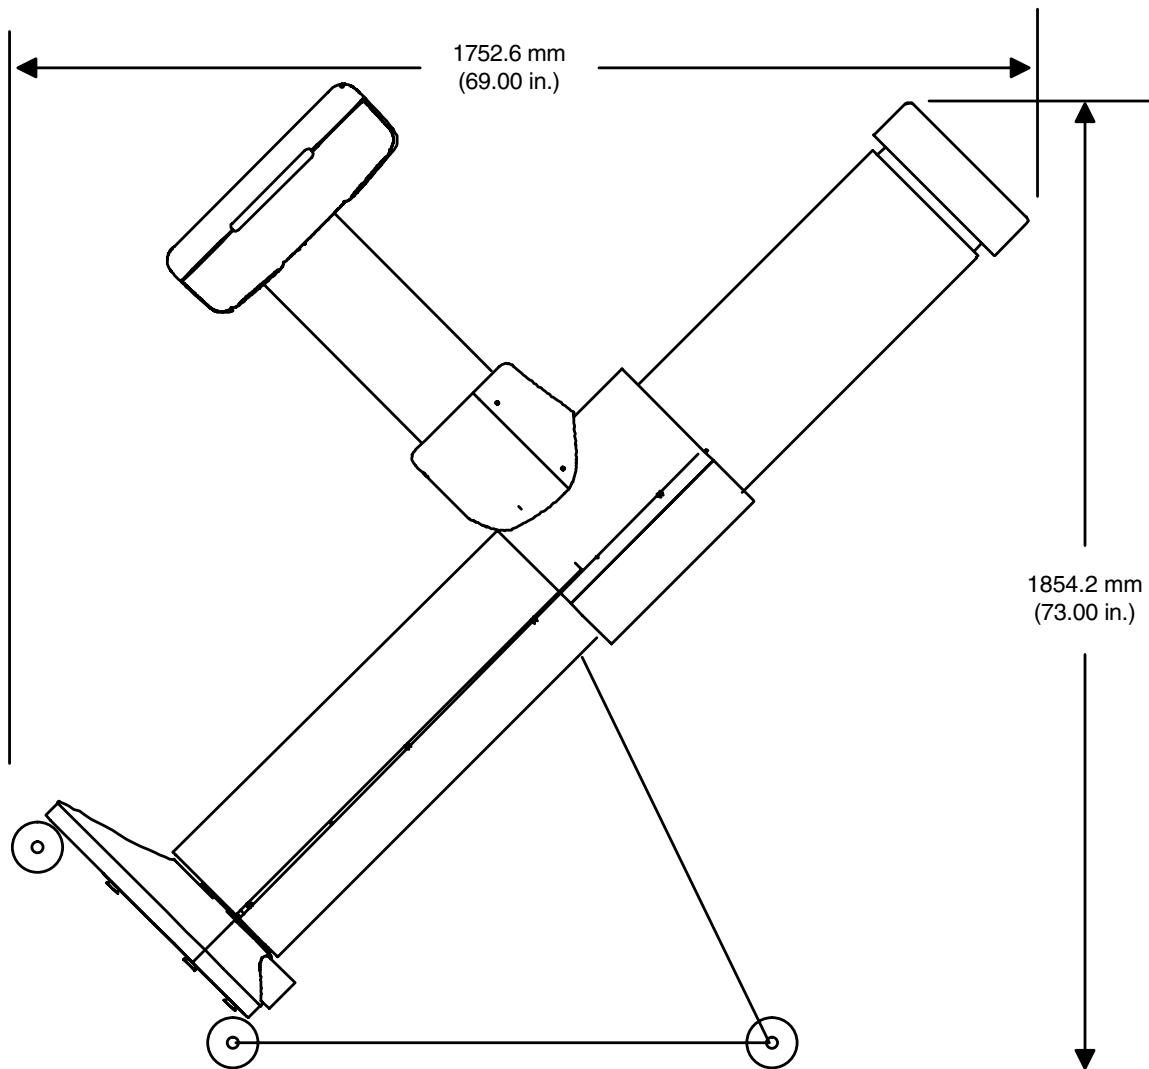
Extended Wall Stand Site In-Transit Dimensions
